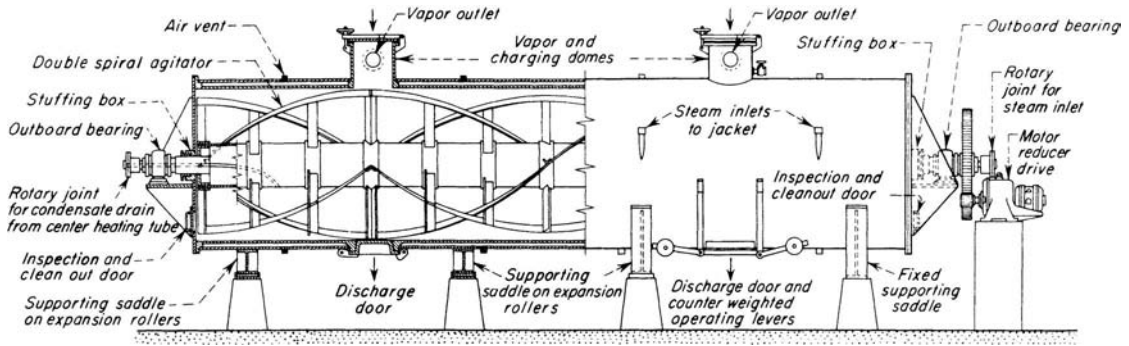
A typical horizontal pan vacuum dryer. (Blaw-Knox Food & Chemical Equipment, Inc.)
